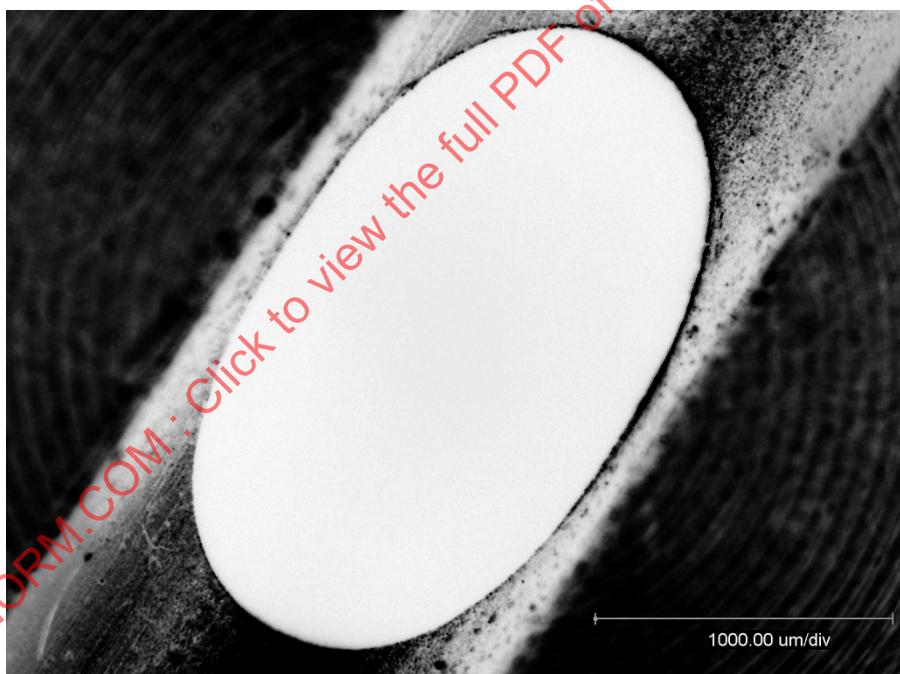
Fan jet nozzle resulting dimensions of spraying hole for checking purpose
